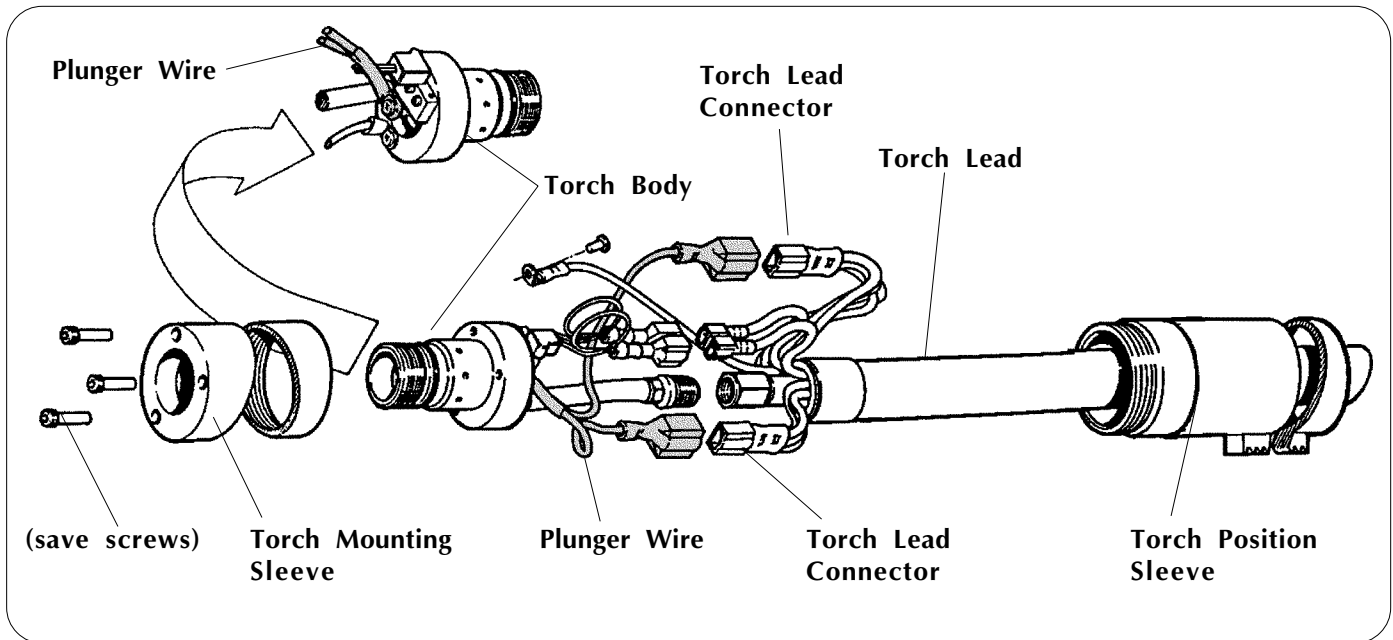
PAC121MS Torch Plunger Wire - Remove/Install
